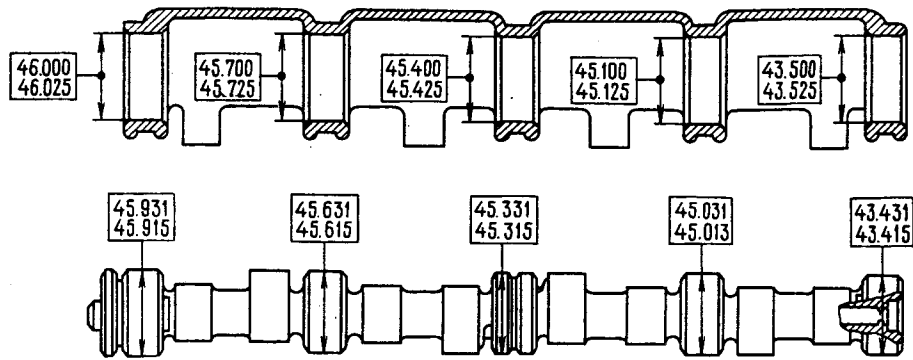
Main Dimensions of Camshaft and of Bores in Camshaft Bearing Housing
